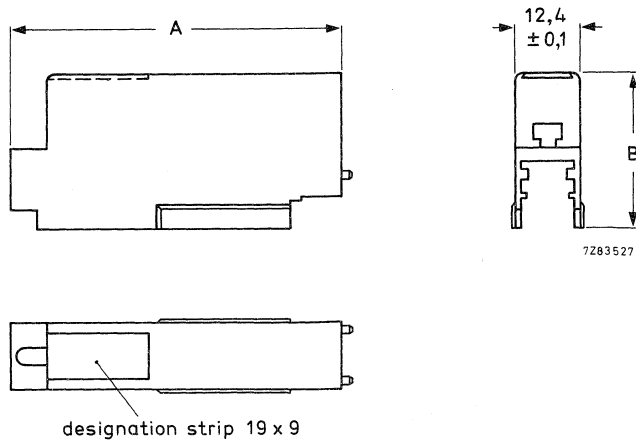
Cable hood; see Table 4 for dimensions A and B.
